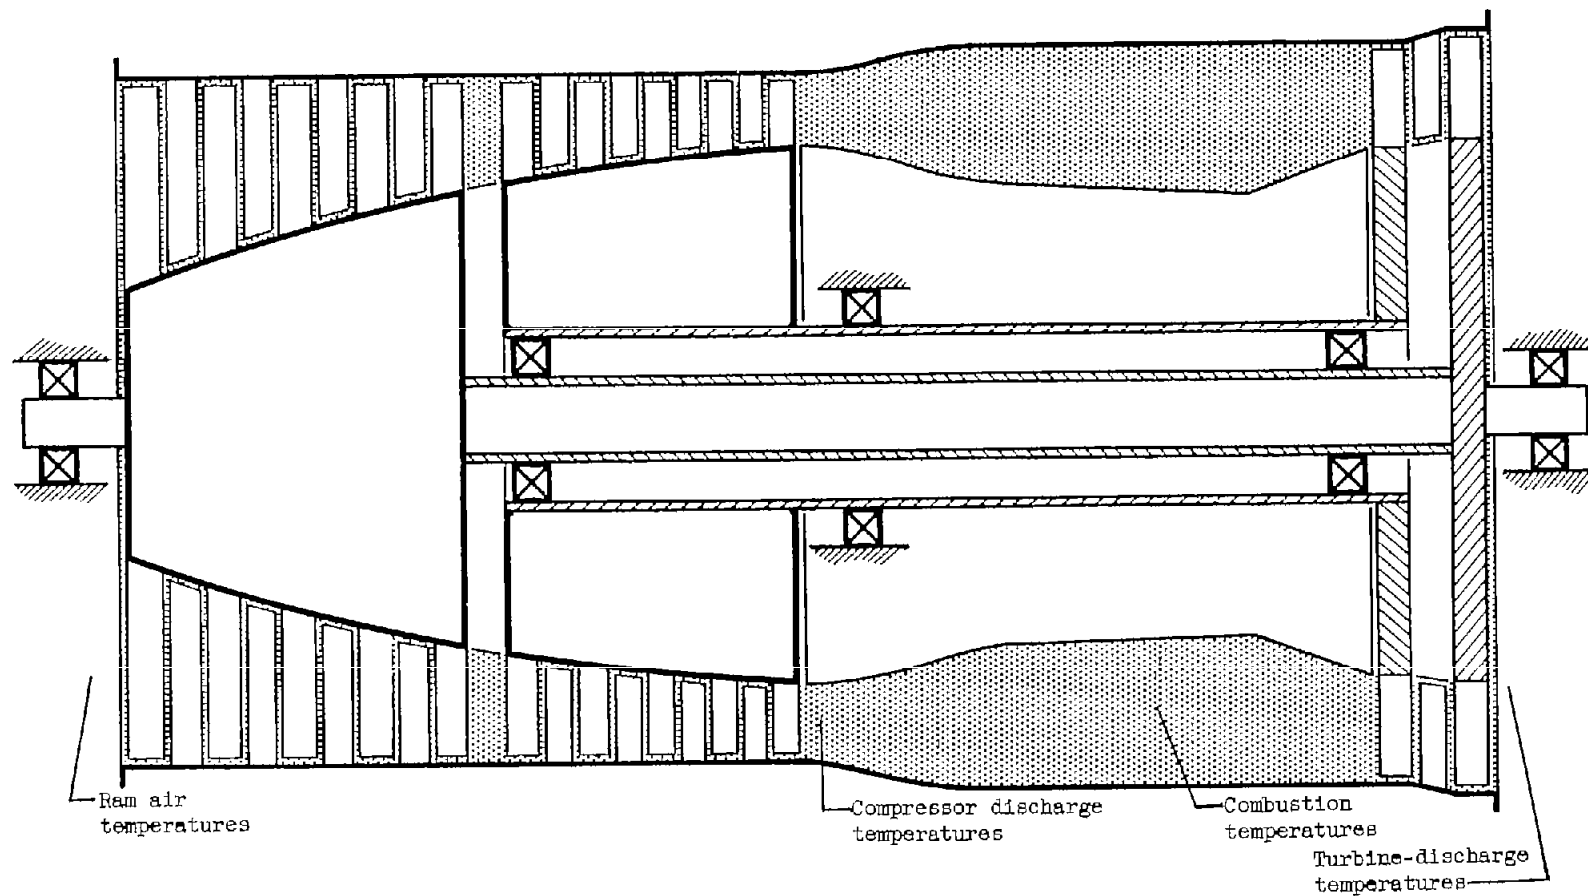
Bearing location in compressor and turbine sections of dual rotor engine.
